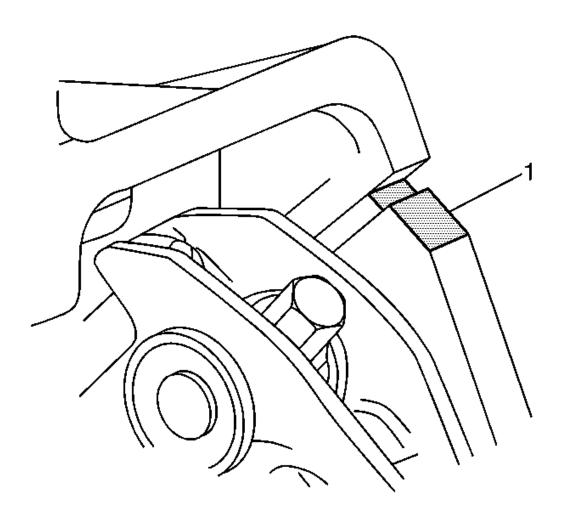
Cylinder Head To Lower Intake Manifold Joint - Rear Courtesy of GENERAL MOTORS CORP.
